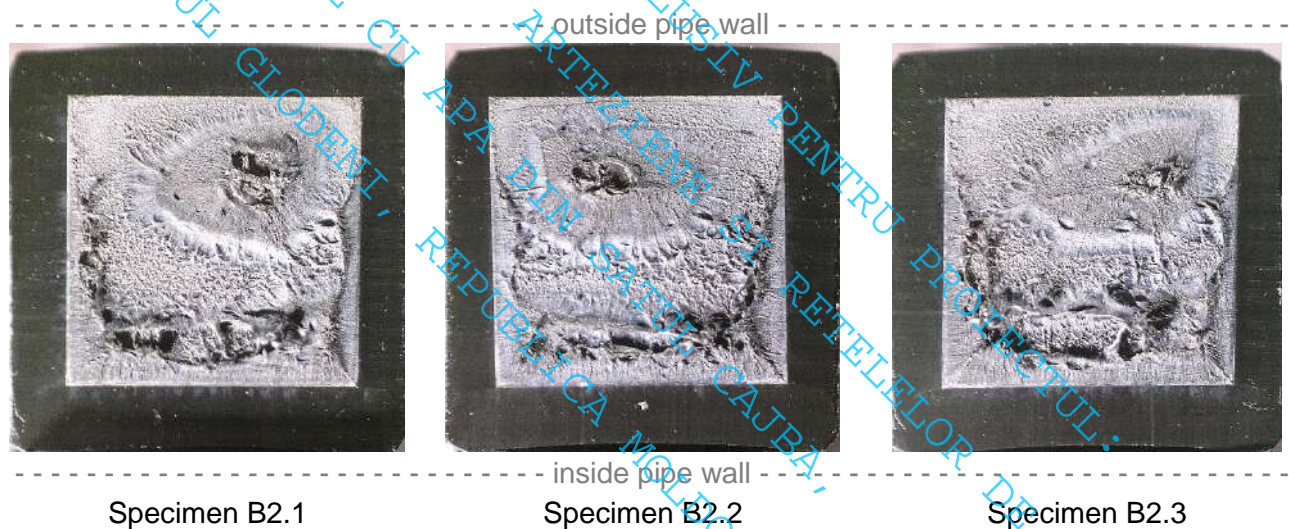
Top view of the fracture surfaces (one half of each specimen)
